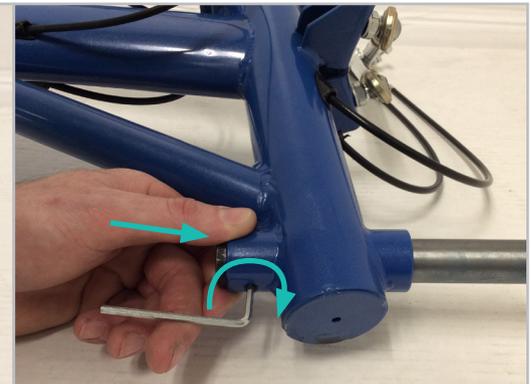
With the shaft inserted all the way forward, secure the shaft by tightening the set screw with the 3 mm hex wrench.
